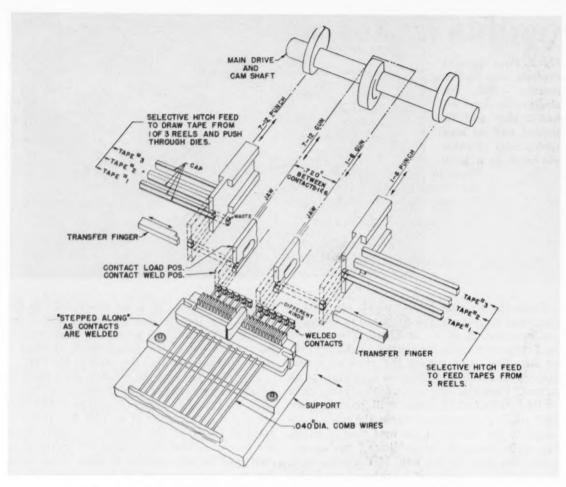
Simplified diagrammatic representation of the percussion welding mechanism showing the punches, gun jaws, tape positions, wire comb, and actuating cam.
